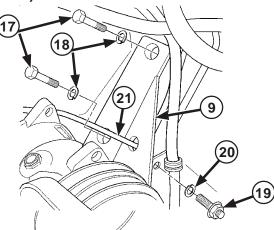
Compressor Mounting Bracket to Cylinder Head
